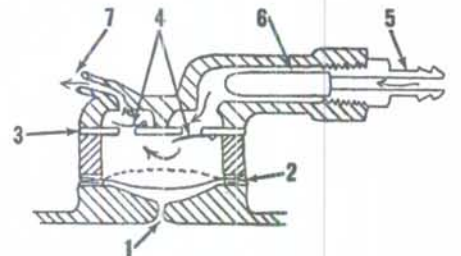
Schematic view of the diaphragm type fuel pump used on all models. Check valves are of the reed type.
